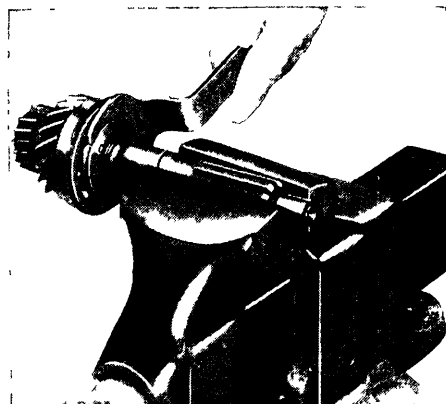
Removing main drive gear retaining nut and oil slinger. 1937-52
